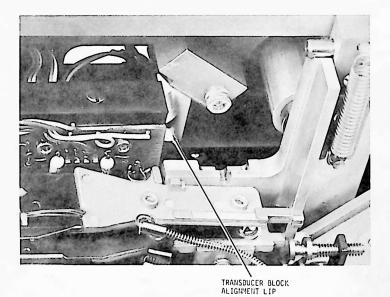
Optical Positioning Transducer Removal and Replacement
